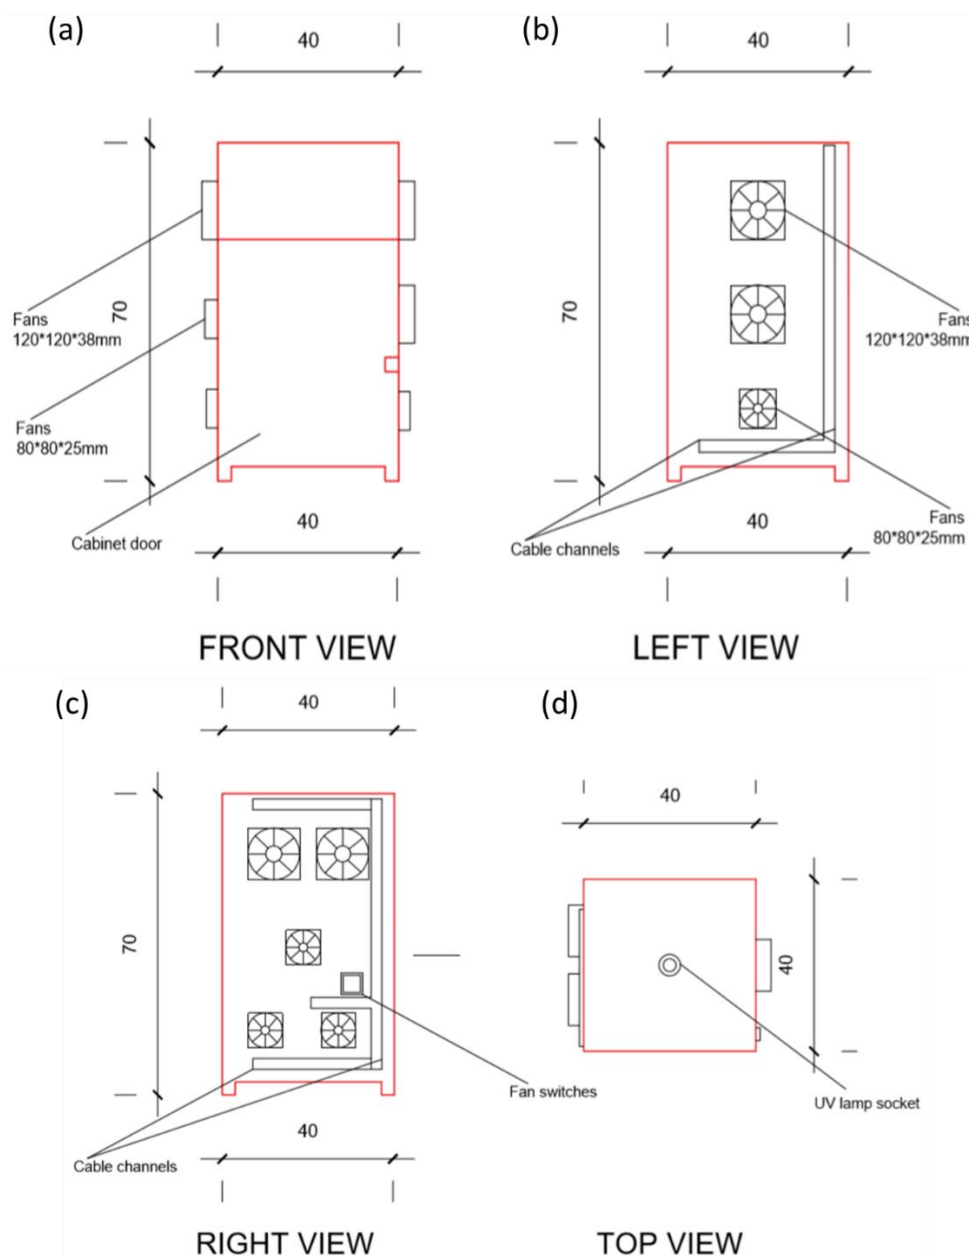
2. The Autocad drawings of UV Lamp Cabin (a) front view, (b) left view, (c) right view, and (d) top view.
